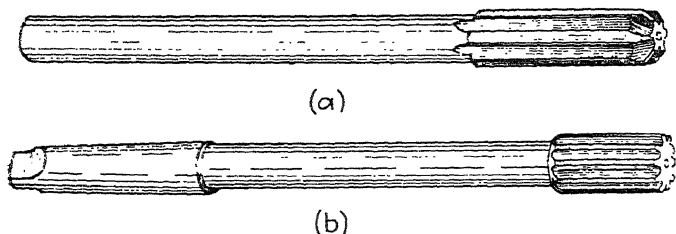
Machine reamers. (a) Straight-shank rose reamer; (b) taper-shank fluted reamer.
